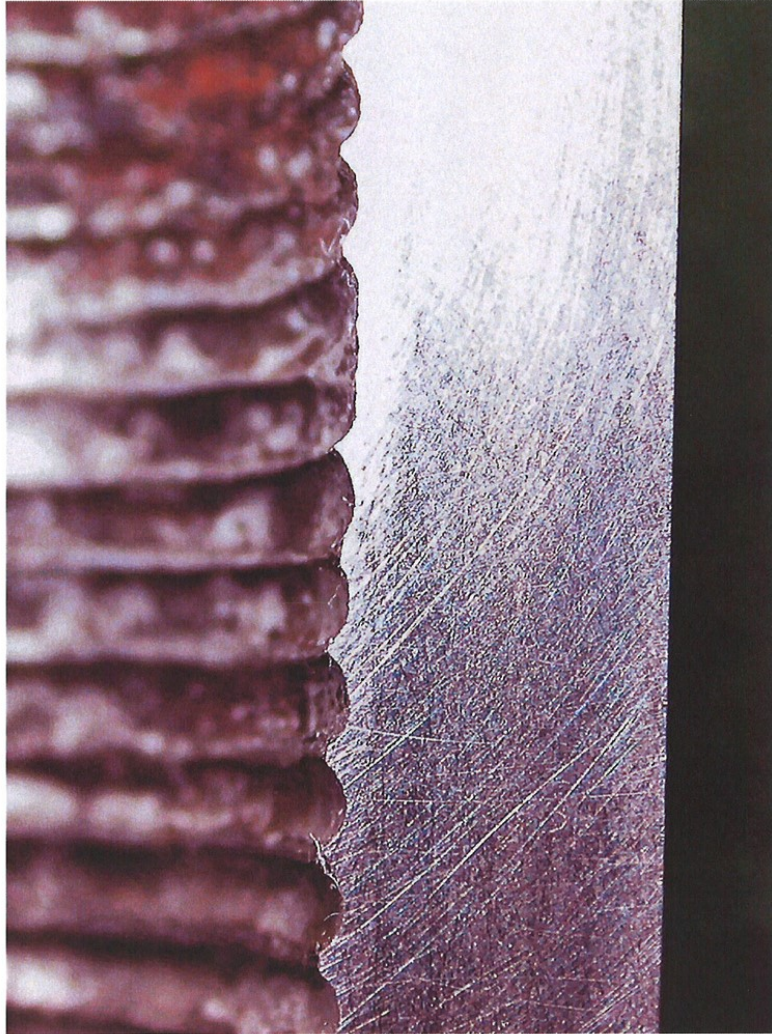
Higher magnification of Figure 20 showing the thread to be heavily corroded.
